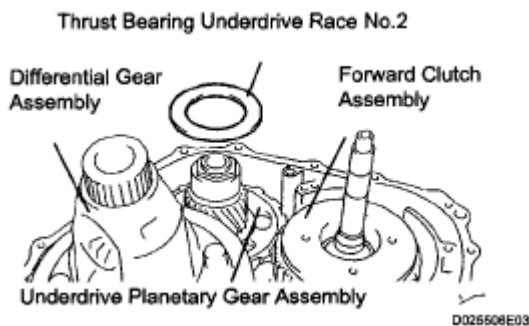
Identifying Differential Gear Assembly, Forward Clutch Assembly And Underdrive Planetary Gear Assembly
